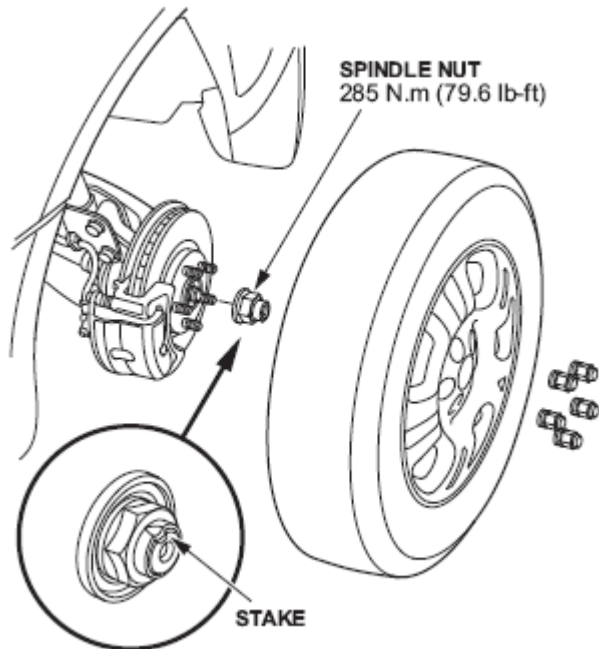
Identifying Right Front Wheel Spindle Nut & Torque Specifications
